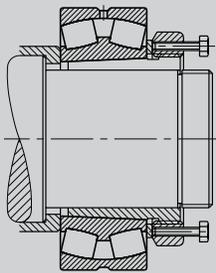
Dismounting of Withdrawal Sleeve by using Bolts
